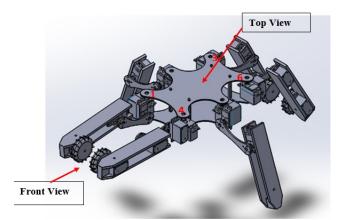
Isometric view for Step 4 – roller wheel rotate backward and front roller will roll upward.
